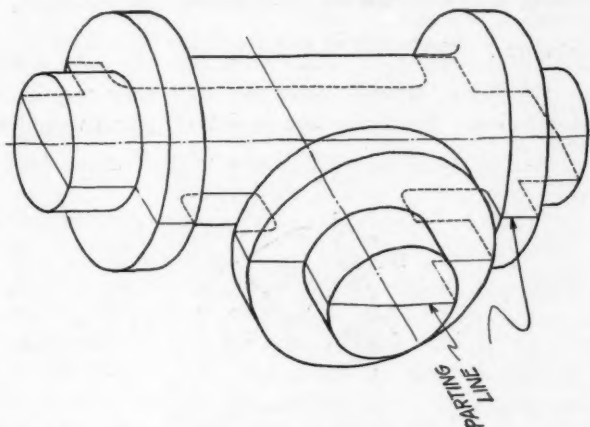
EXAMPLE OF SPLIT PATTERN, SHOWING FLAT PARTING LINE THROUGH CENTER OF PATTERN, MAKING FOR EASE OF MOLDING BY HAND OR FOR MOUNTING ON FLAT PATTERN MOUNTING BOARDS FOR MACHINE MOLDING.
